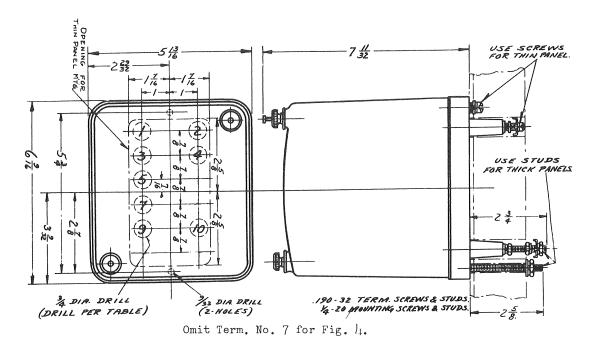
Outline and drilling plan for the glass cover case - projection type mounting (Figures 3 and 4)
